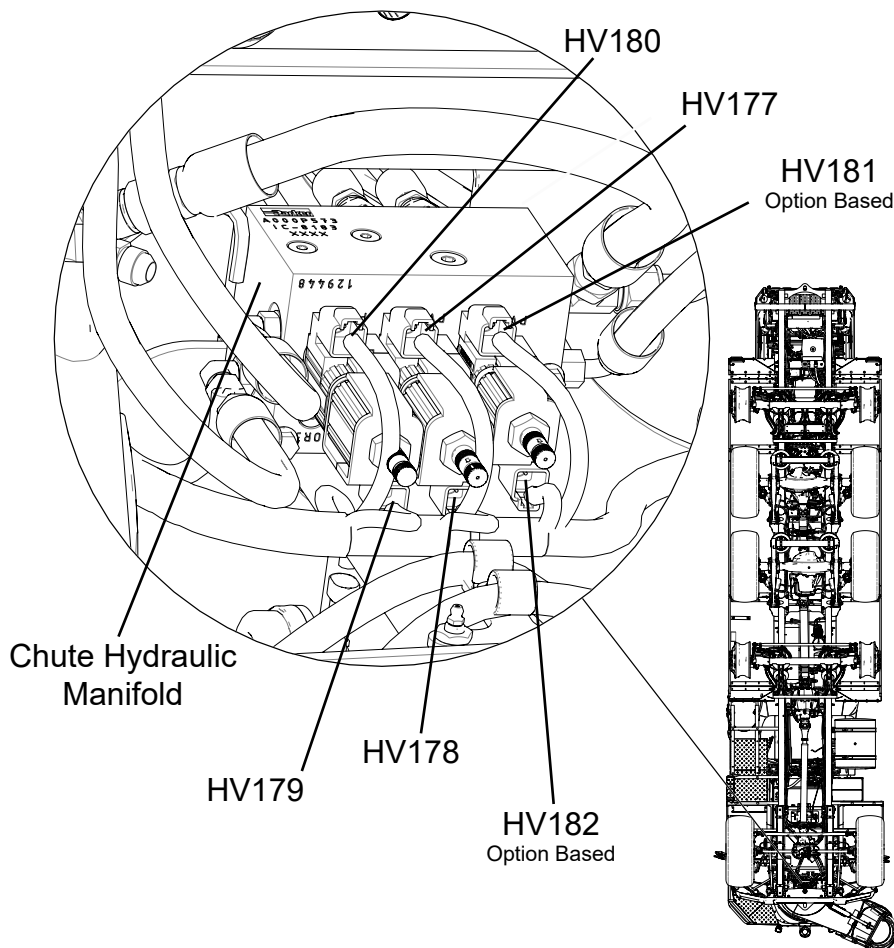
Power Chute Hydraulic Manifold (Bottom View of Truck)
